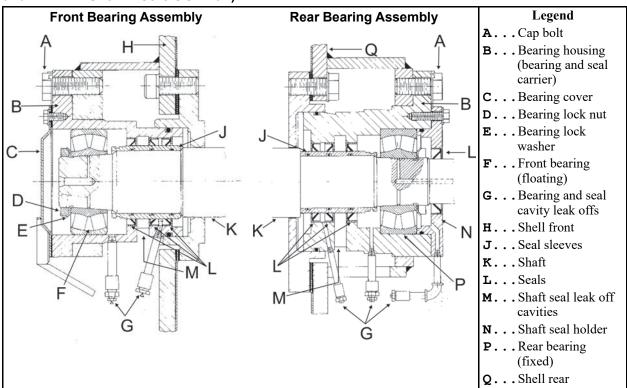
Cross Section View of Front and Rear Bearing Assemblies (Bearing Assembly for 60" and 72" WED Shown. Others similar.)
